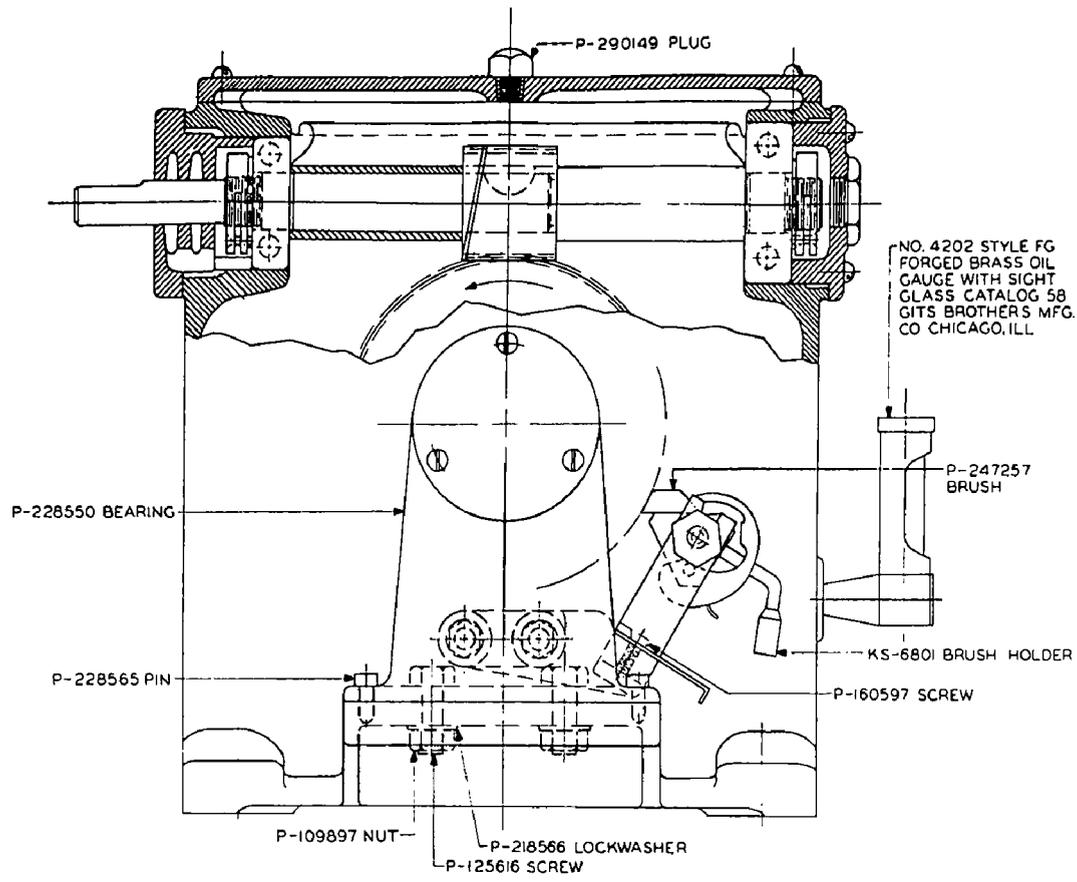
1A and 1B Interrupter Mountings—Side View (For Top View See Fig. 2 and 3)
